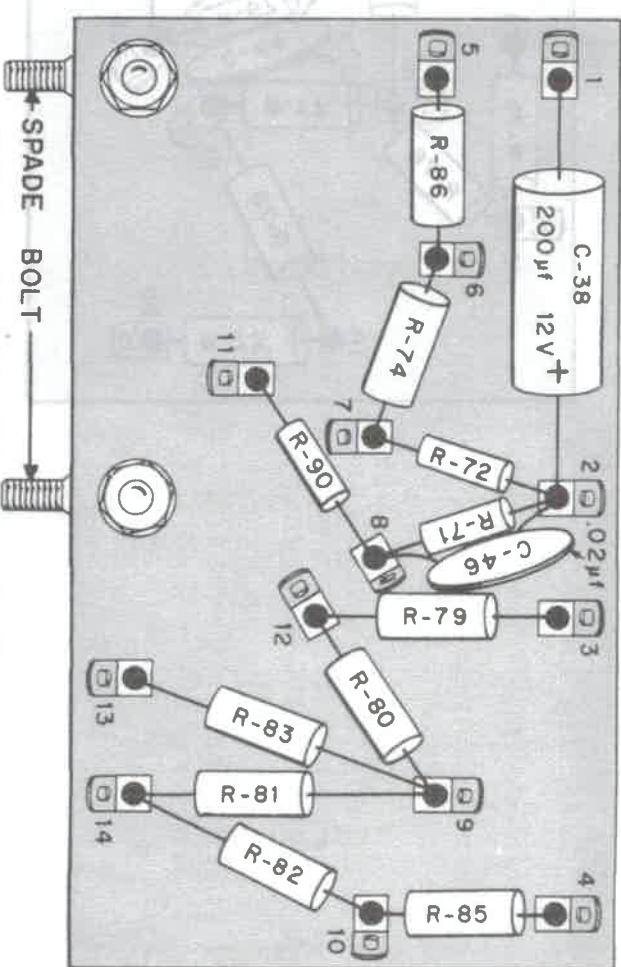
ASSEMBLING THE LARGE TERMINAL BOARD
